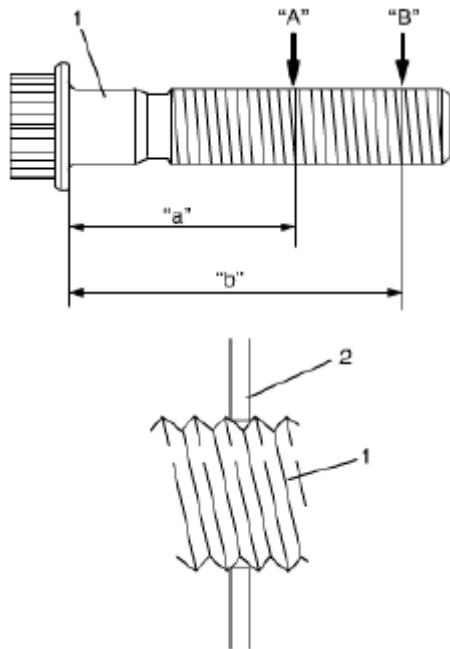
Measuring Thread Diameter Of Connecting Rod Bolts Using Micrometer
